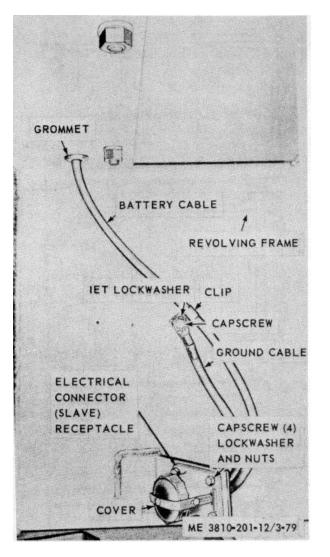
Receptacle (slave) electrical connector, removal and installation.
